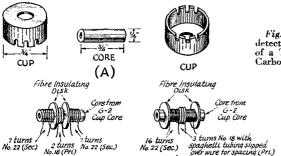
Sketches showing winding and assembly of detector transformers T₁ and T₂. (A) — Three parts of a Type G-2 cup core manufactured by Stackpole Carbon Co., St. Marys, Penna. (B) — Winding details
